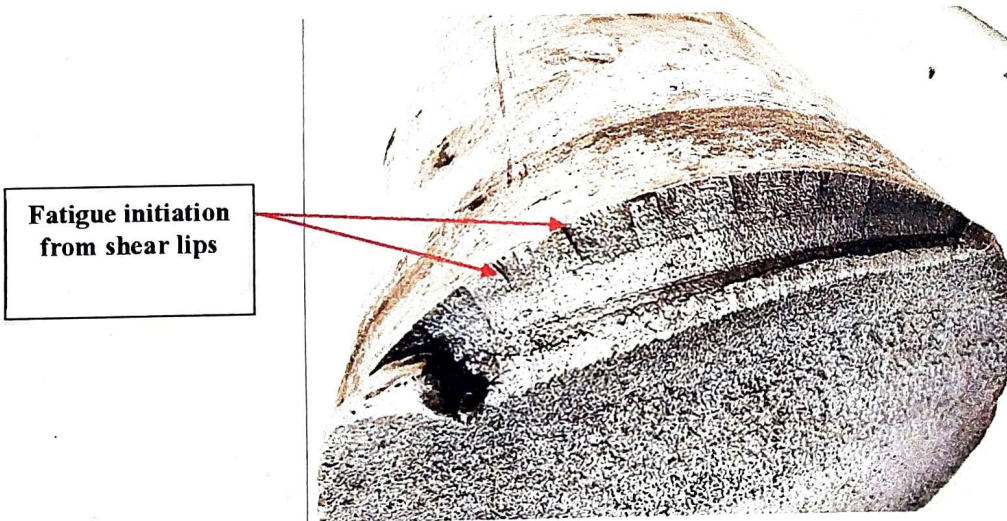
Photograph of fracture face showing shear lips and subsequent fatigue initiation from the shear lips in sample no. 153/23/2.
